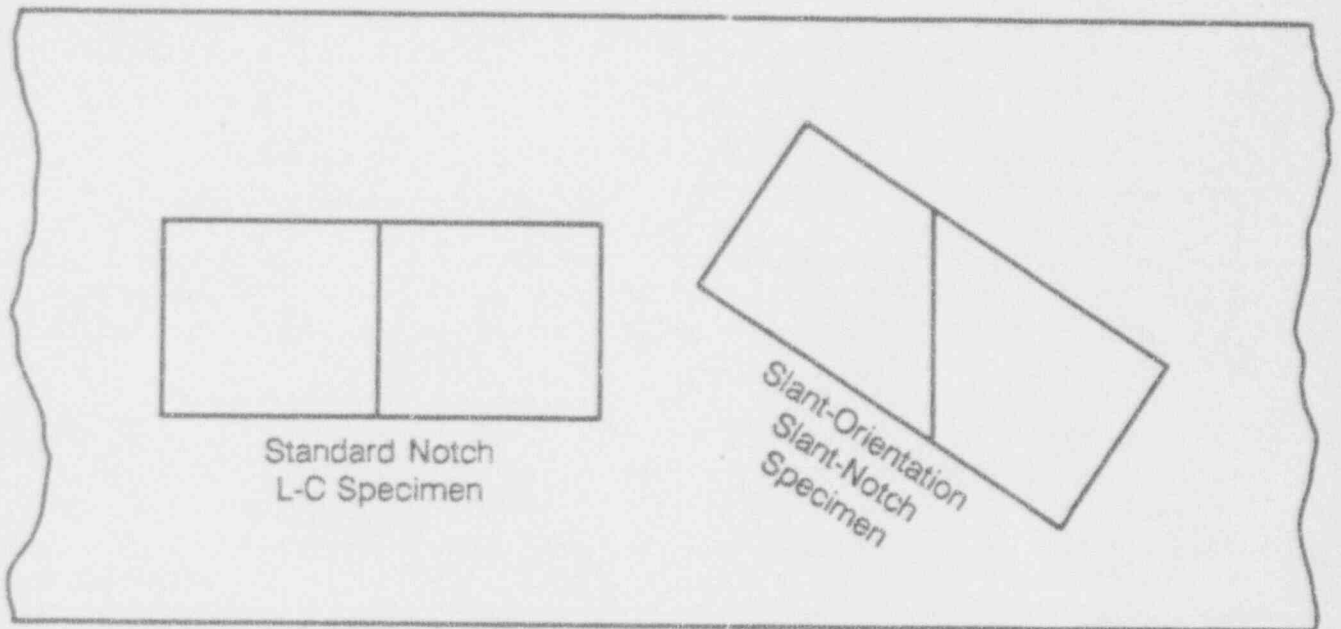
Schematic of straight and slant-notch oriented C(T) specimens
